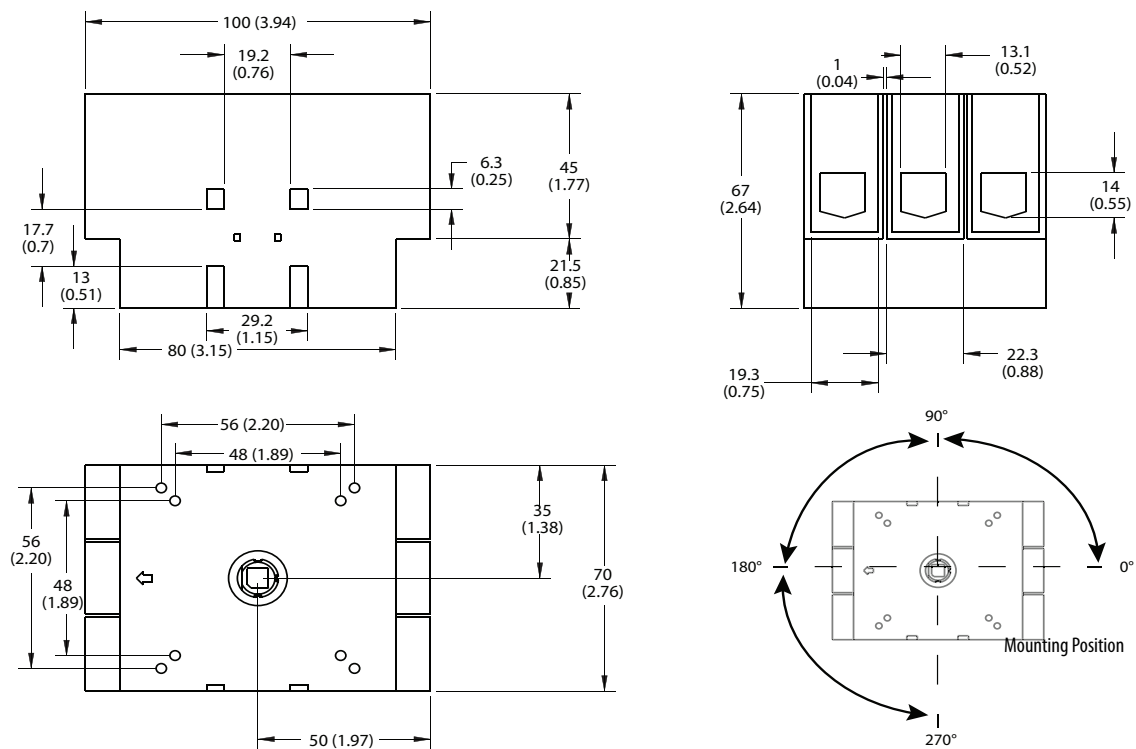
160 A Base-mounted Switches, 3-pole Devices
